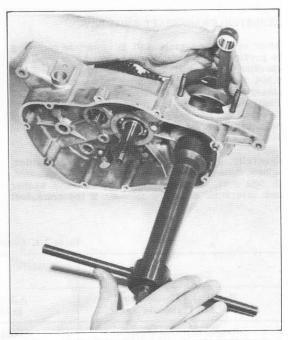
Reinstalling Crankshaft Assembly In Right Crankcase Side
